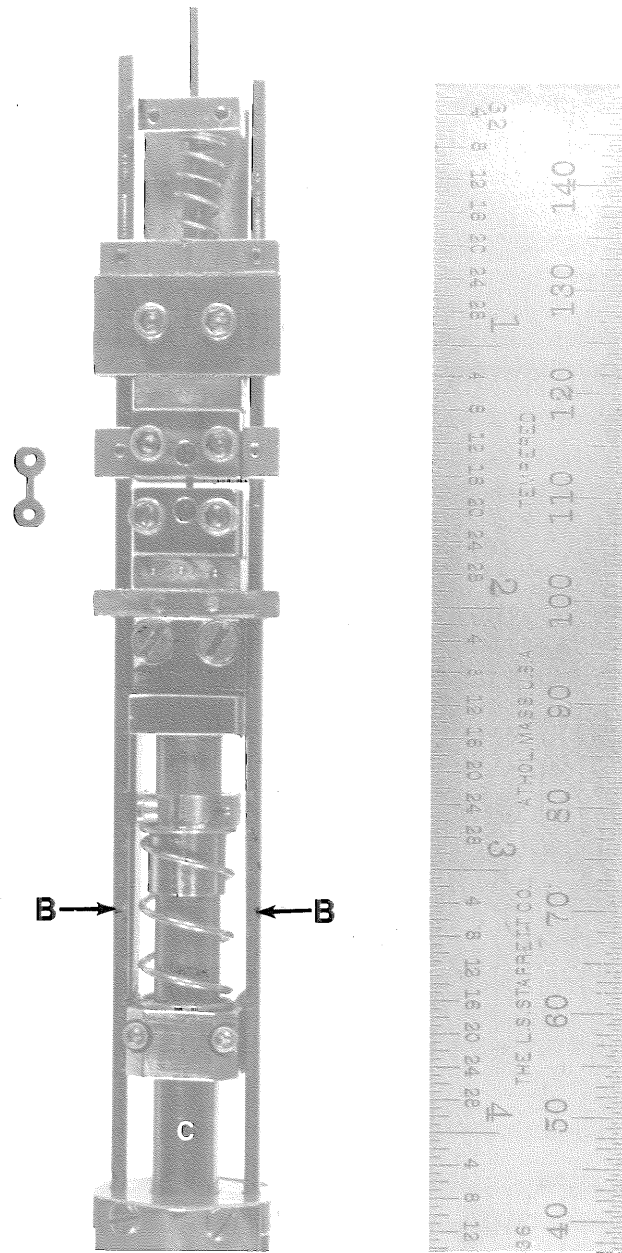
The tensile test fixture with a sample tensile specimen is shown in the picture. The springs are used to hold the pins firmly to the holes in the tensile specimen. The upper pin is attached to the guide wires labeled "B". The lower pin is attached to the central tube labeled "C".
